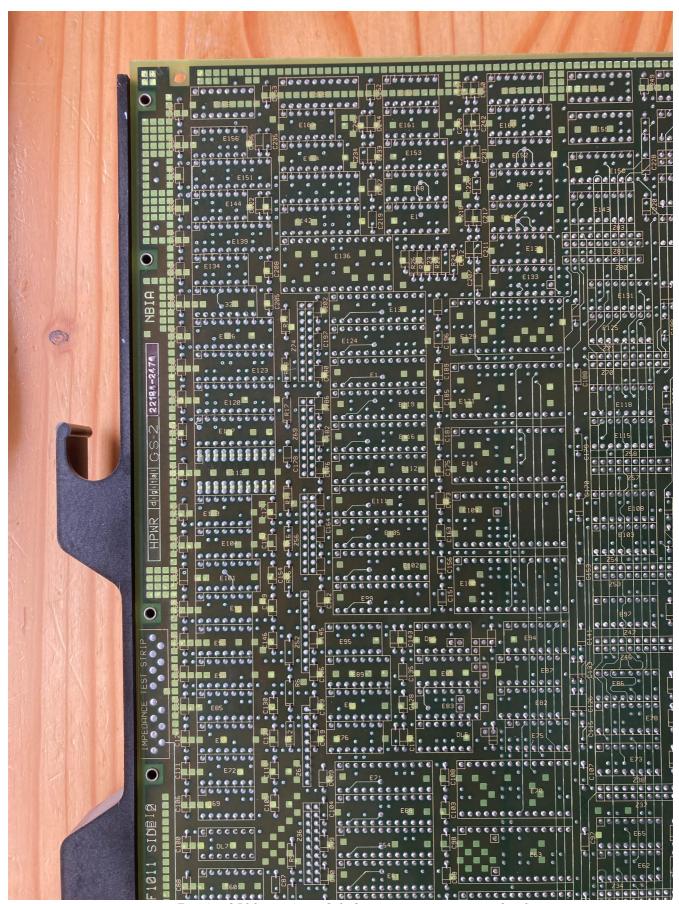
VAX 8530 NBIA module bottom view, upper right closeup
